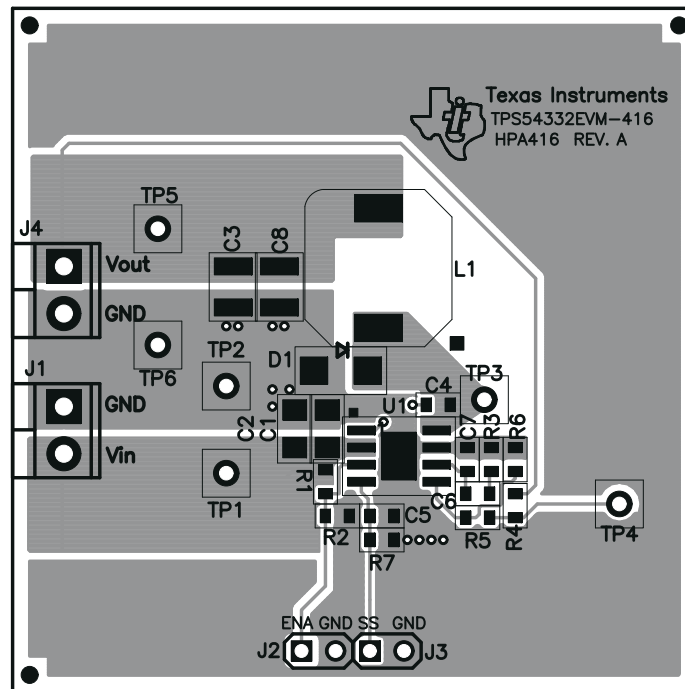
TPS54332EVM-416 Top-Side Assembly
